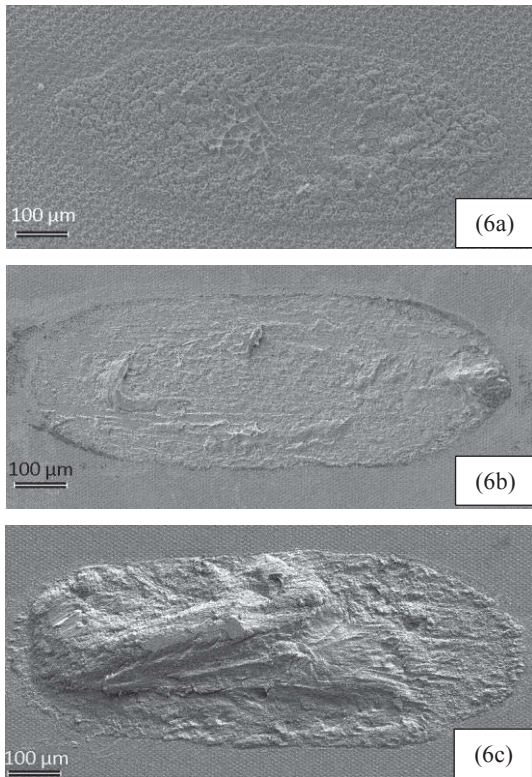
Fracture surfaces of Al wedge bonds after (a) power cycling test, (b) mechanical shear fatigue at RT and (c) 80°C
